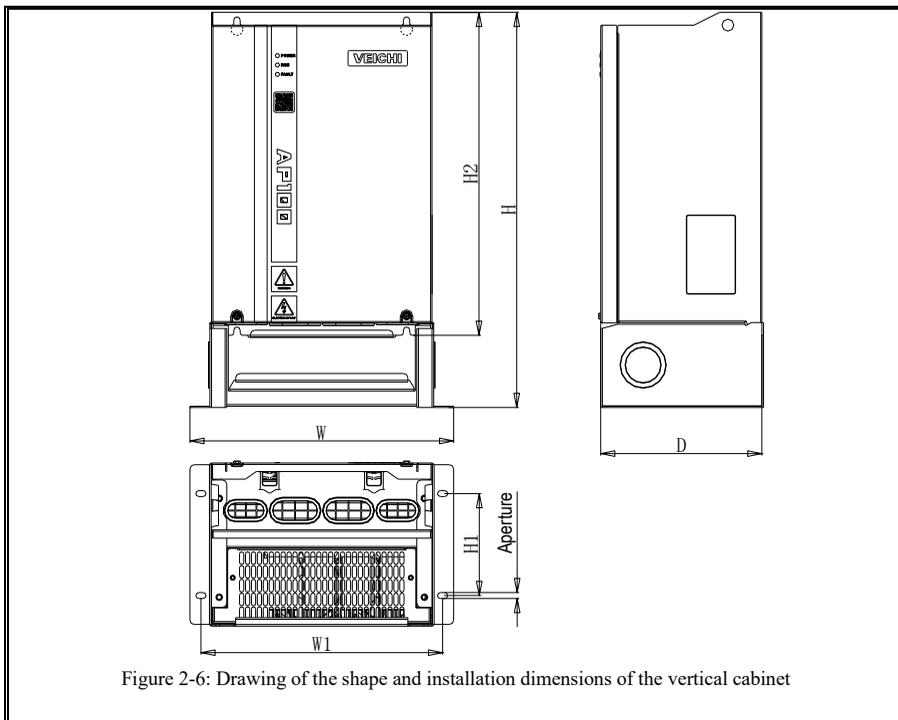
Drawing of the shape and installation dimensions of the vertical cabinet
